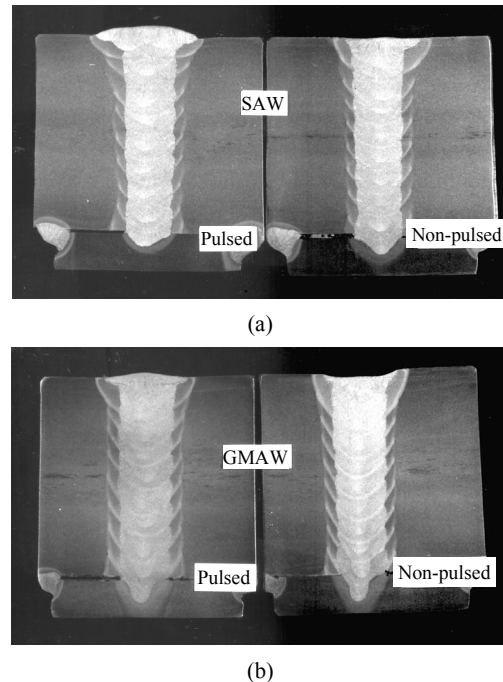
Macrographs of NG welds in 50 mm Q&T steel plate: NG-SAW (a) and NG-GMAW (b)
